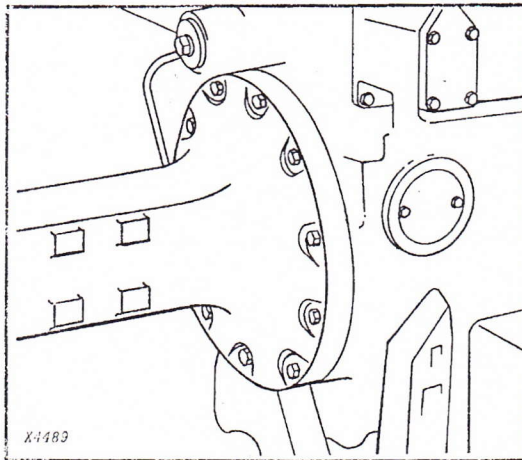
Tractor Rear Axle Housing Fastened to Differential Housing with Cap Screws
